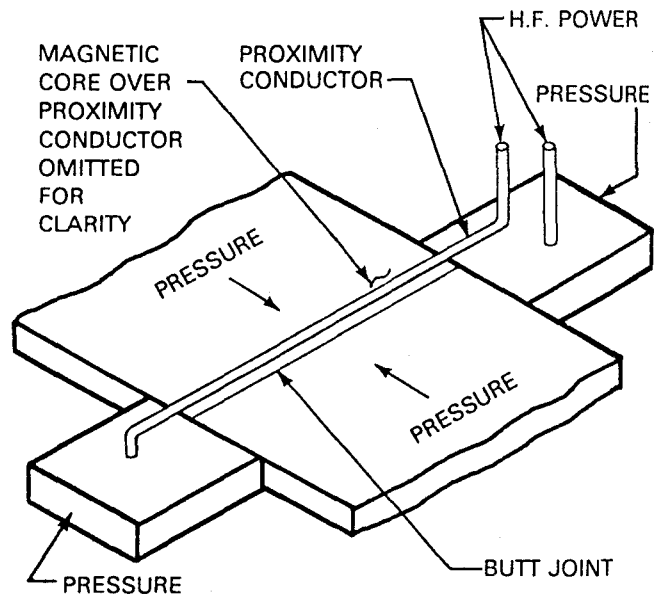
Joining Strips Together Using High-Frequency Welding
